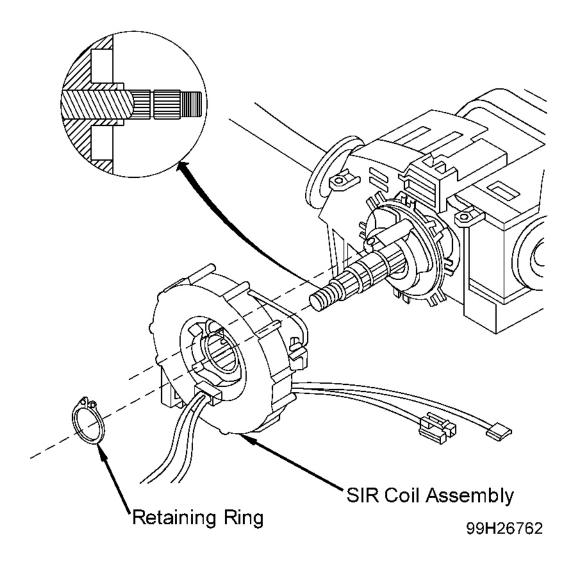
Identifying SIR Coil Assembly Courtesy of ISUZU MOTOR CO.
